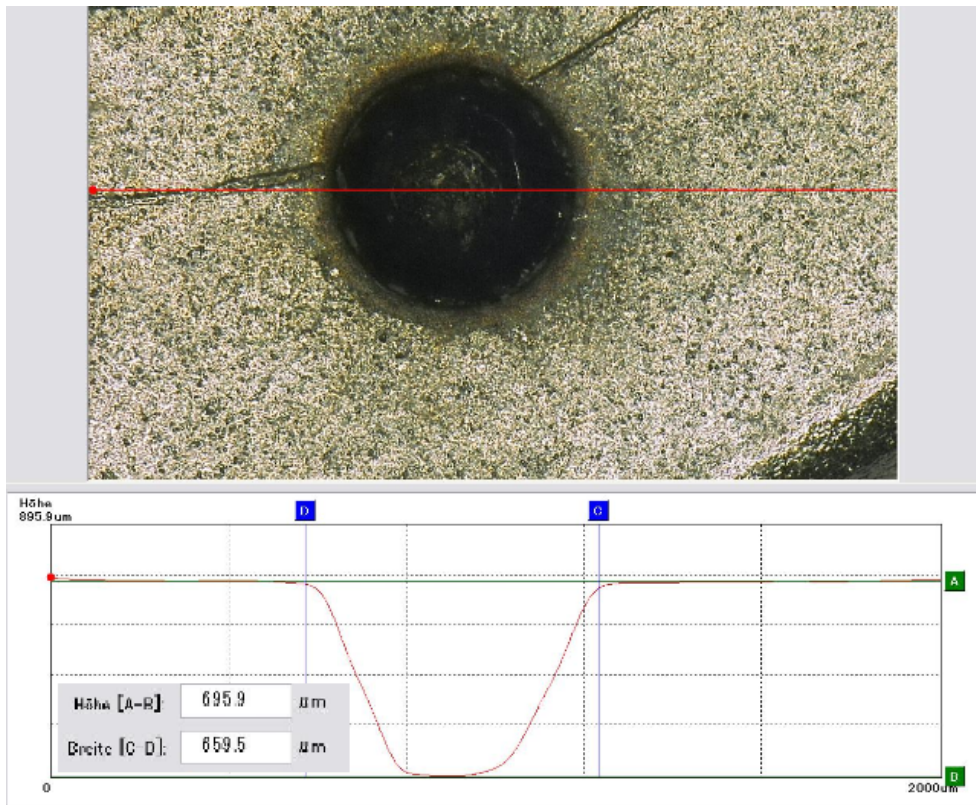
Picture and profile of a hole machined in a fuel injector with the sidewalls of the tool non-insulated.
